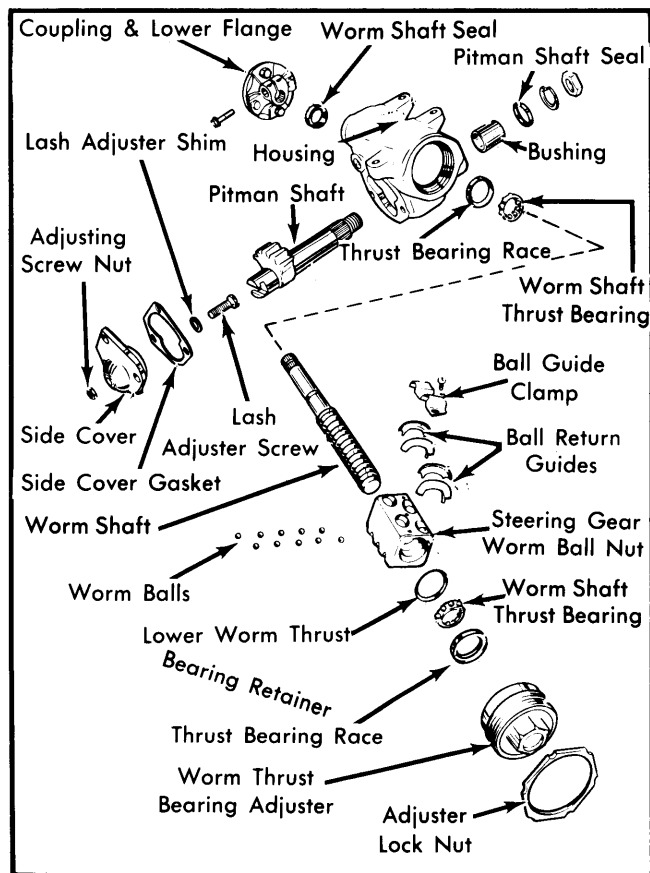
Saginaw Ball Bearing Worm and Nut Steering Gear
